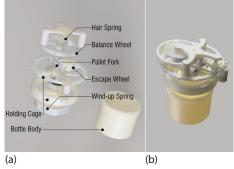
Mobile tag design: (a) Tourbillon bottle tag explosion view and (b) assembly view.
